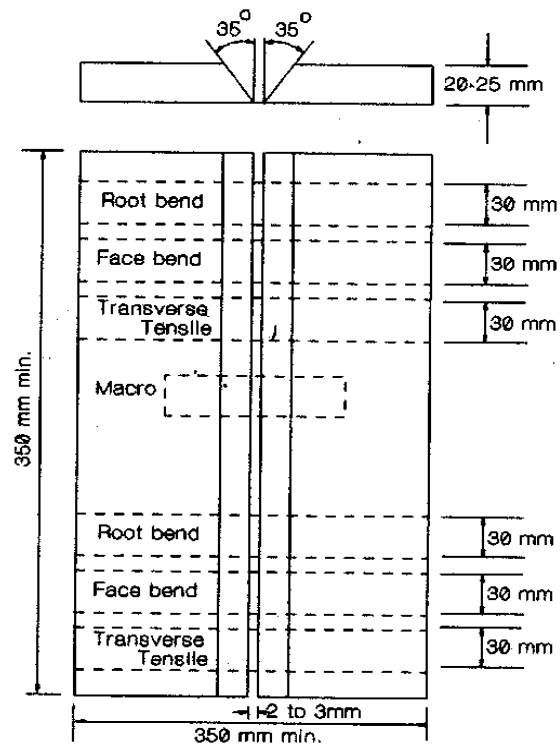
Additional butt weld assembly (downhand)
